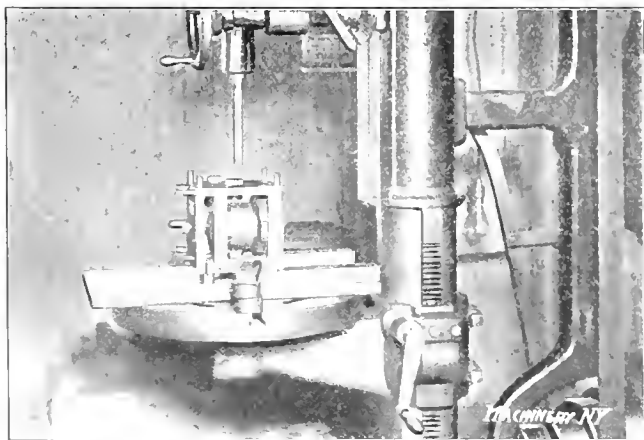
Jig in which Wrist-pin Holes are Reamed
